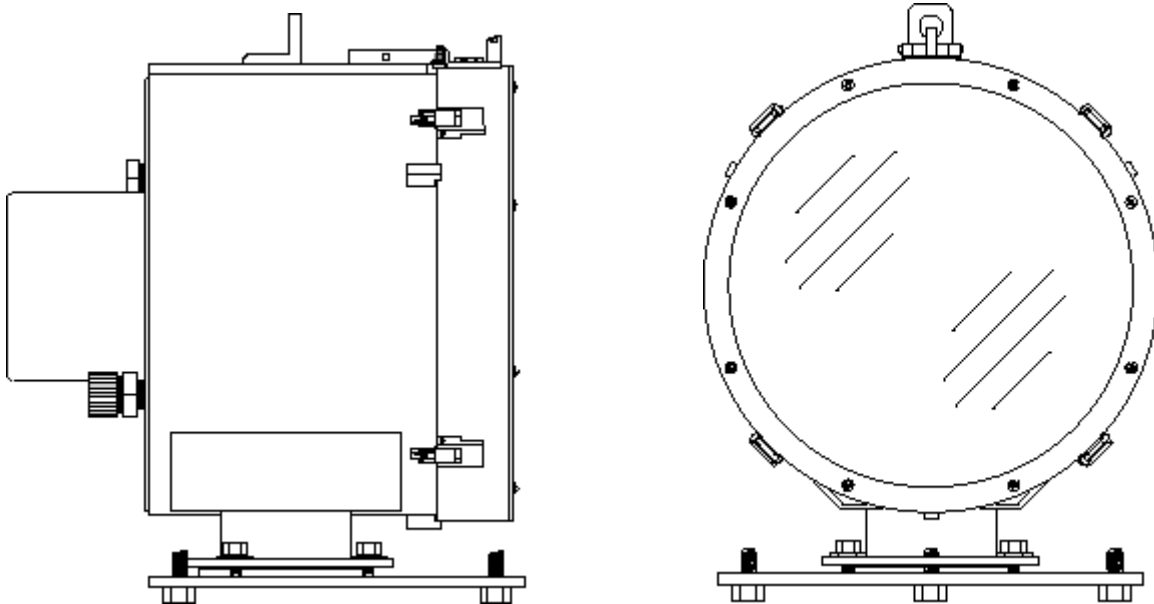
Dimensions of the DCB224 Rotating Beacon.
